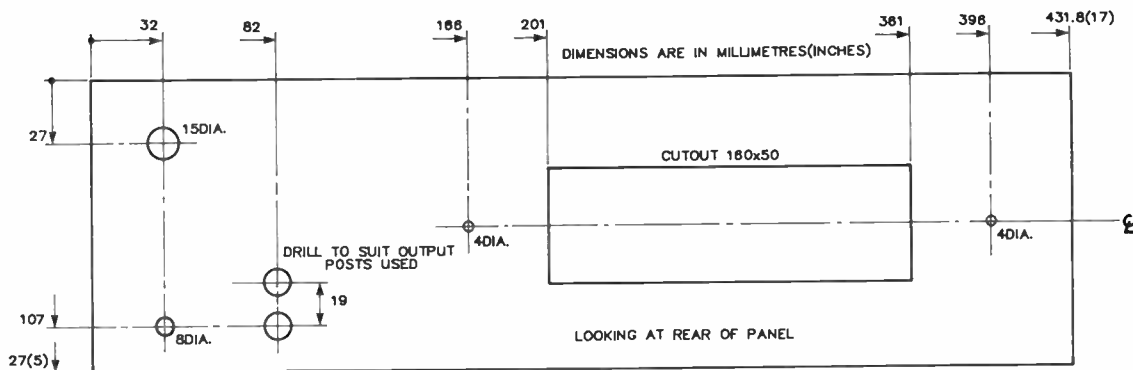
Rear panel drilling details, showing the heatsink cutout.
